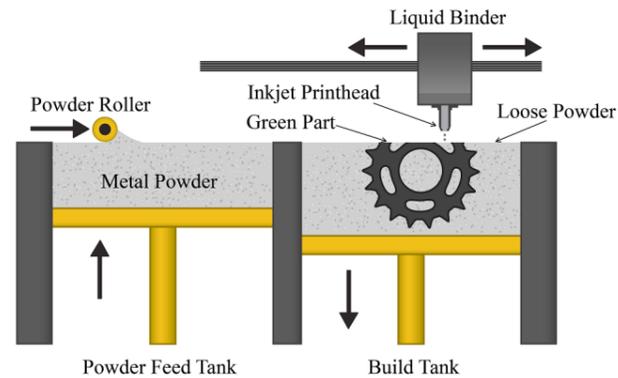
b: Schematic diagram of Sand Mould 3D printing (Binder Jetting) (Sand 2017)
